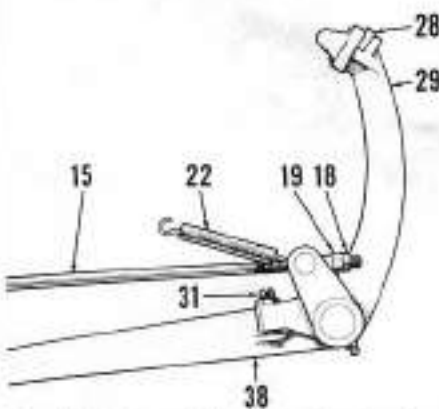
On models with drum brakes, brake rods (15) are adjusted by loosening locknut (18) and turning adjusting nut (19); refer to text. Adjusting screw (31) is to maintain pedal alignment so that pedals are equal height in released position.
